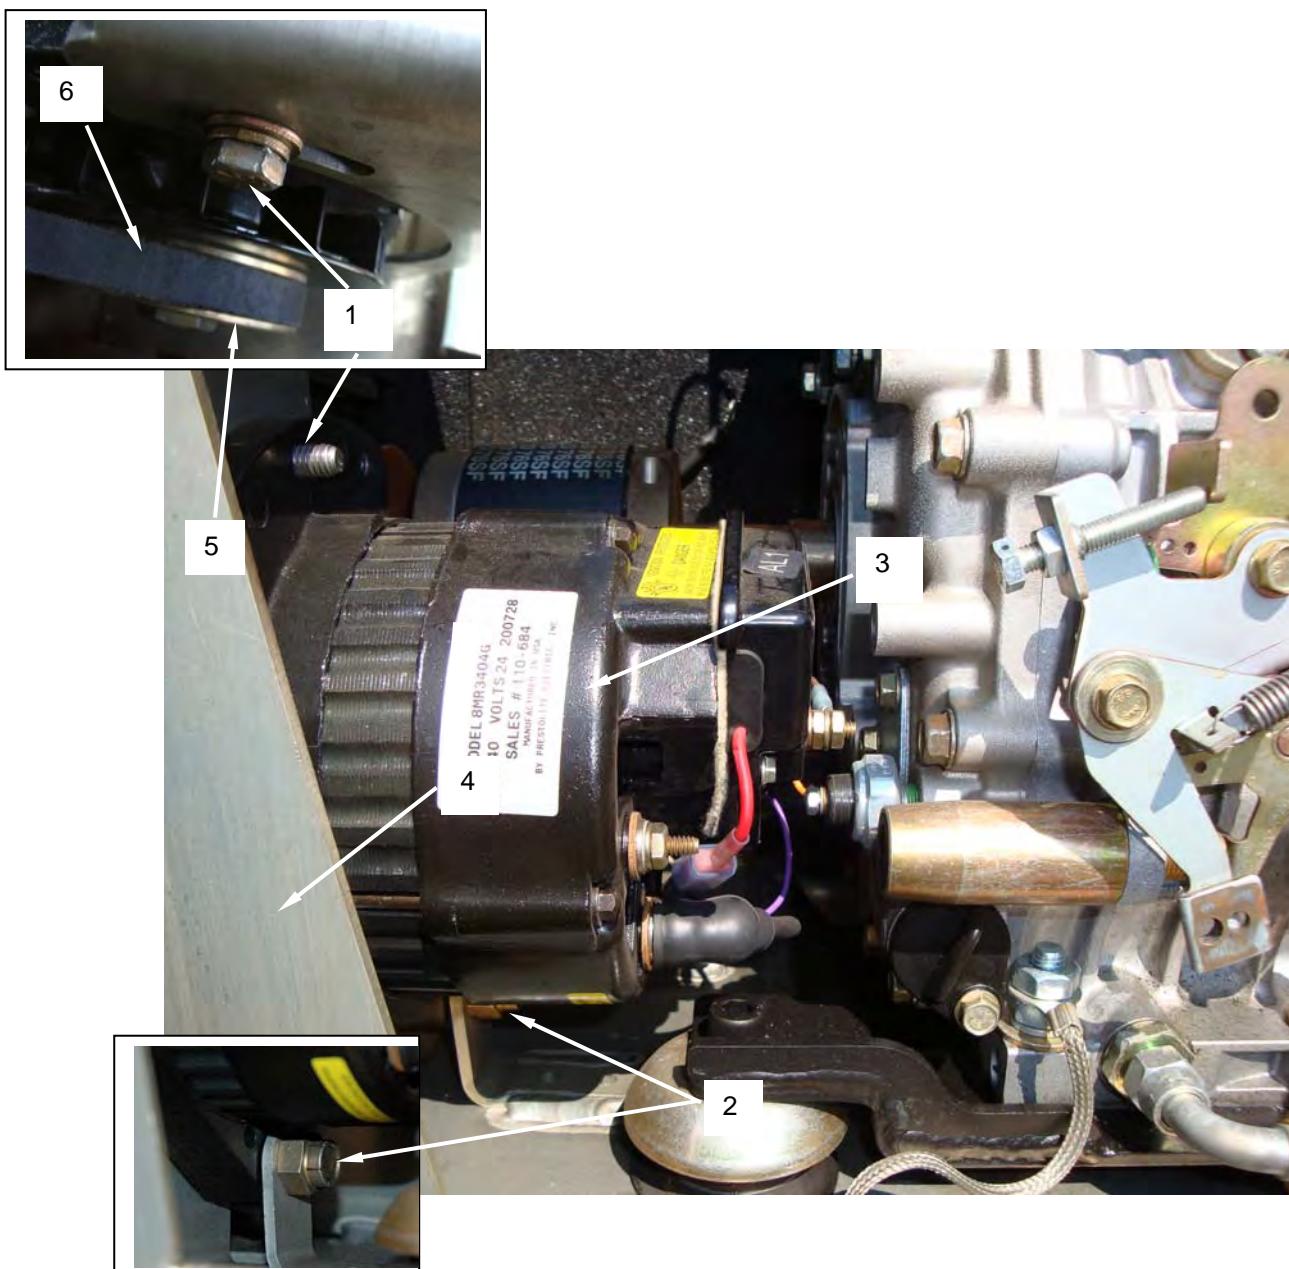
Adjust and Replace 24V Alternator Assembly and Drive Belt (Sheet 1 of 3).
